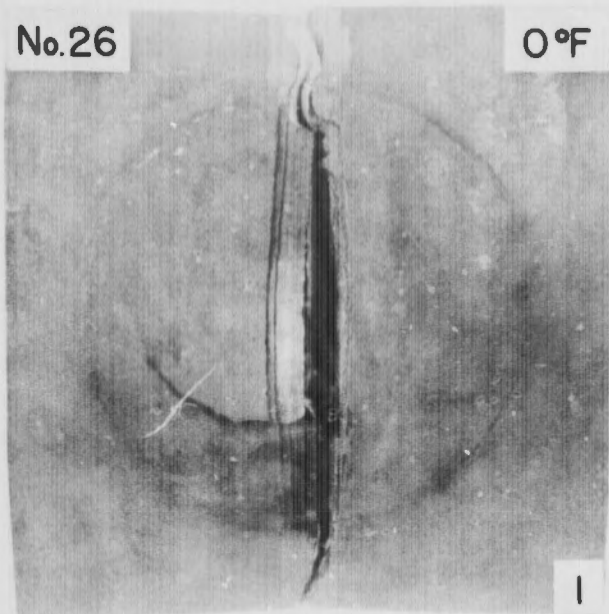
Explosion bulge test fracture characteristics of submerged arc (Code E) weldments. (HY-80 is Code Z heat No. 20739)
